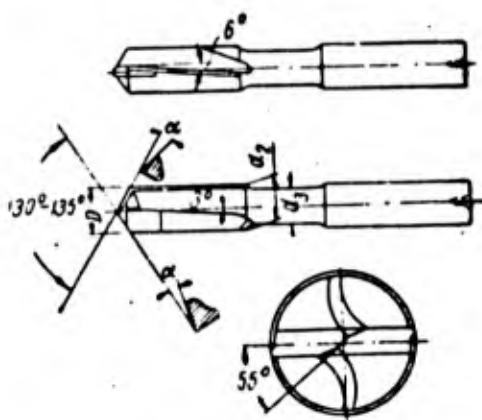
Design of Straight-Fluted Drill, Carbide-Tipped
